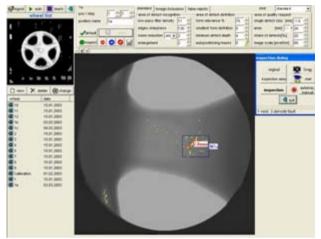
Identification of casting defects in the Xpect program [14]
